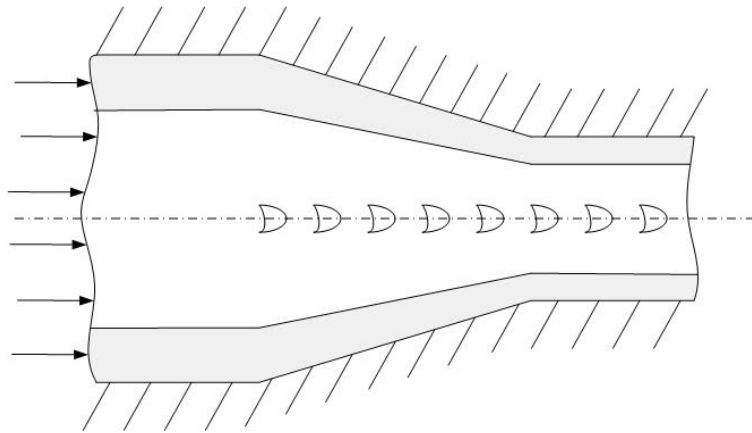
Center bursting or chevroning defect in composite rod extrusion
